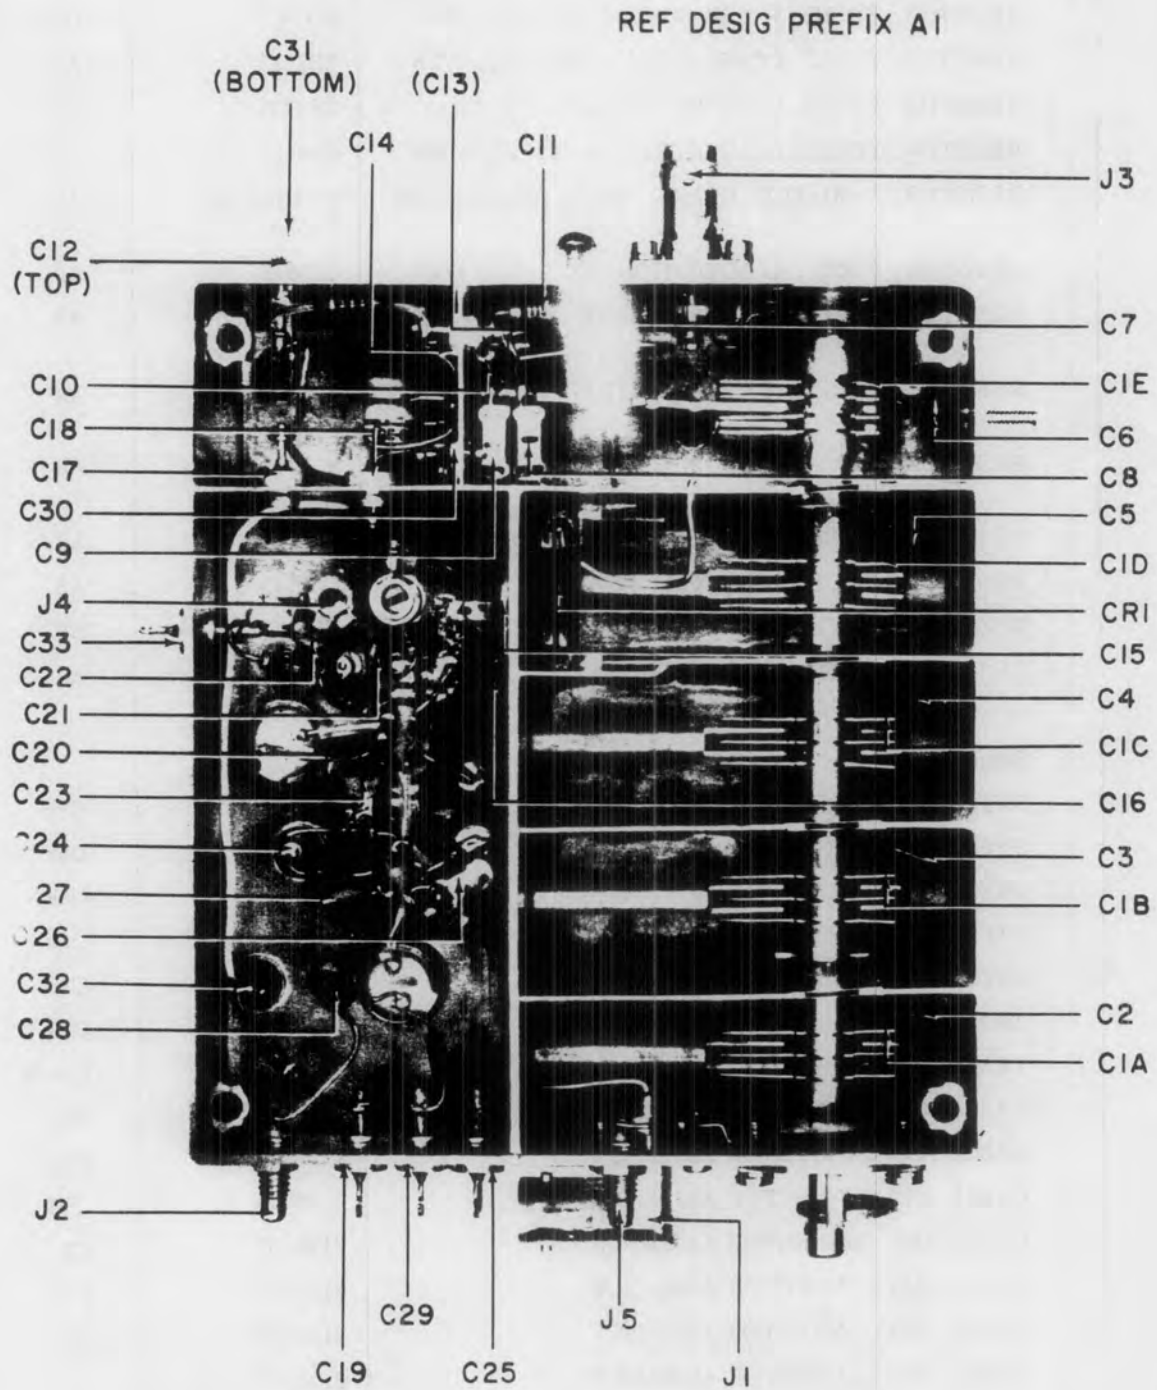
490-1000 mc RF Tuner Type 7111, Component Locations
